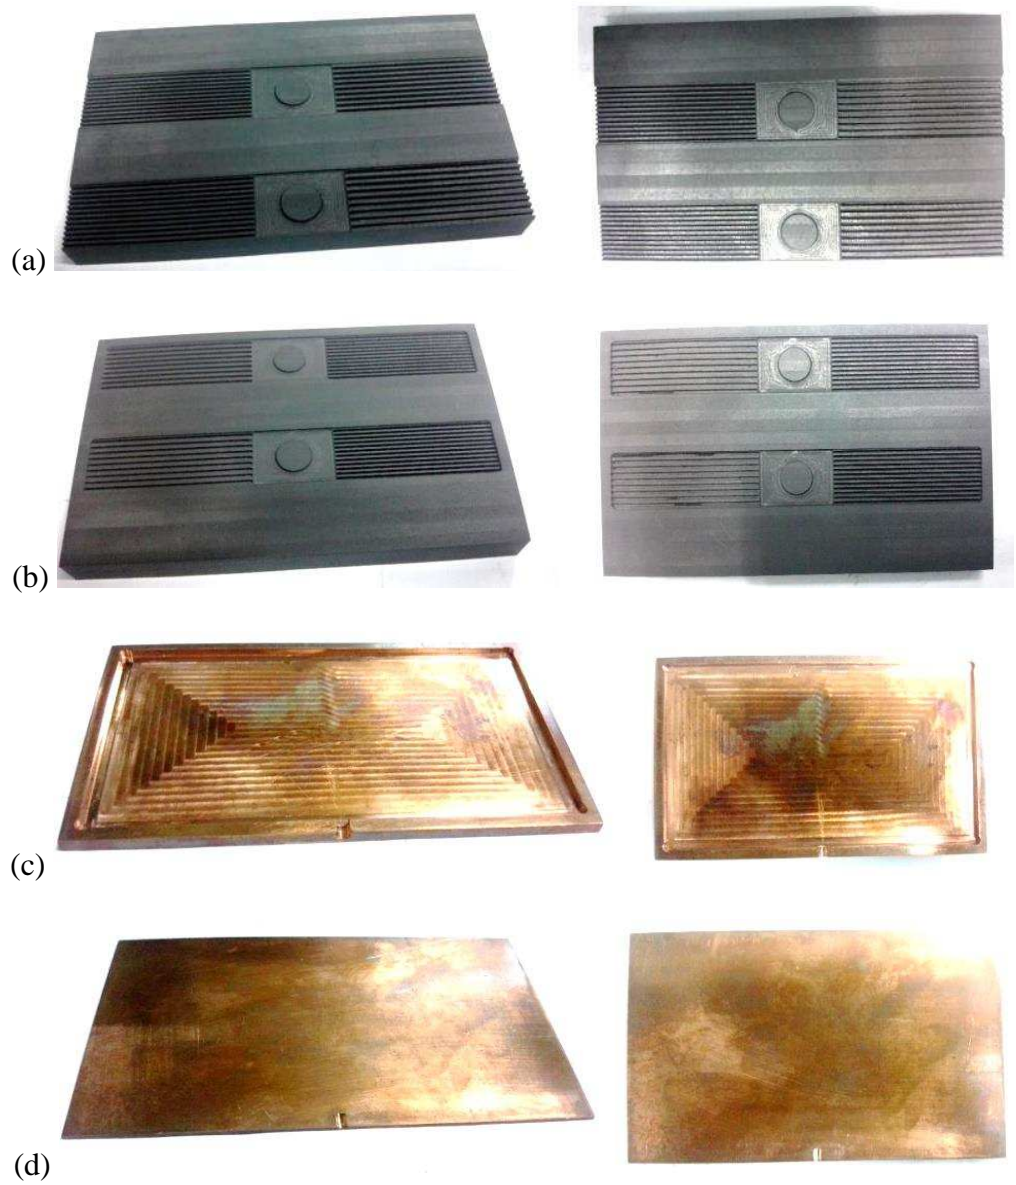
FPHP parts: (a) upper wick mould; (b) bottom wick mould; (c) upper copper plate; (d) bottom copper plate.
